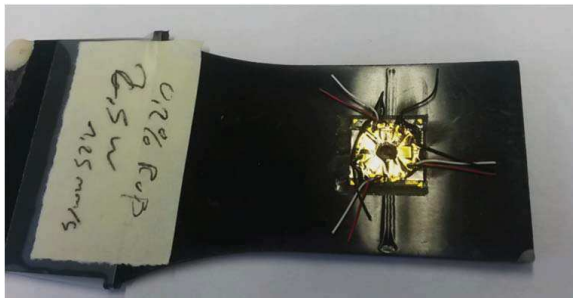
Welded sample separated from the other joint partner due to inappropriate welding process parameters. The laser power was 2.5 W for a feed rate of 1.25 mm/s.
